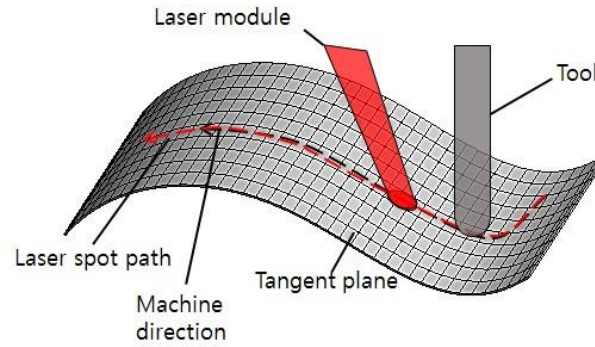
Schematic diagram of the curved shape machining using laser assisted milling
